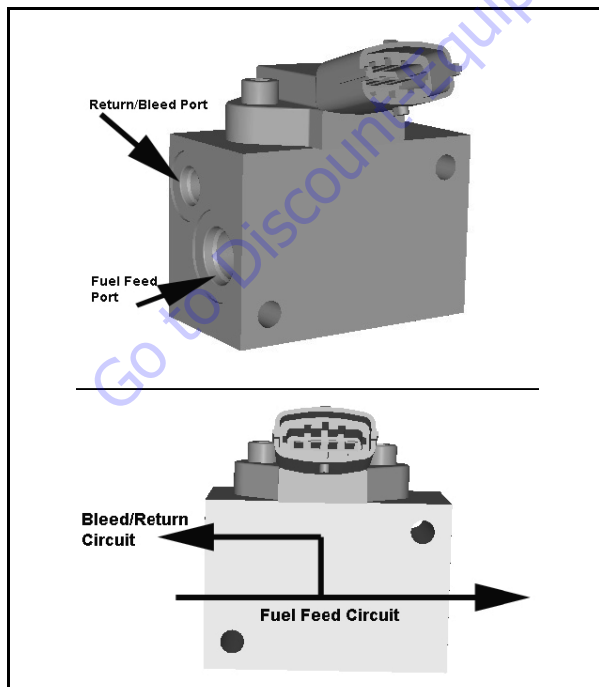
Gasoline Fuel Pressure and Temperature Manifold Assembly
